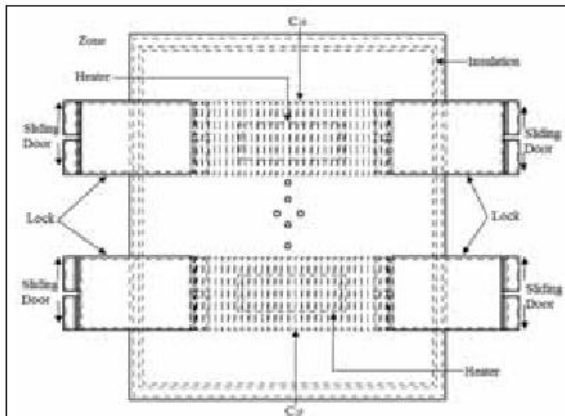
Top View of Single Cylindrical Zone with Two Locks on each side
